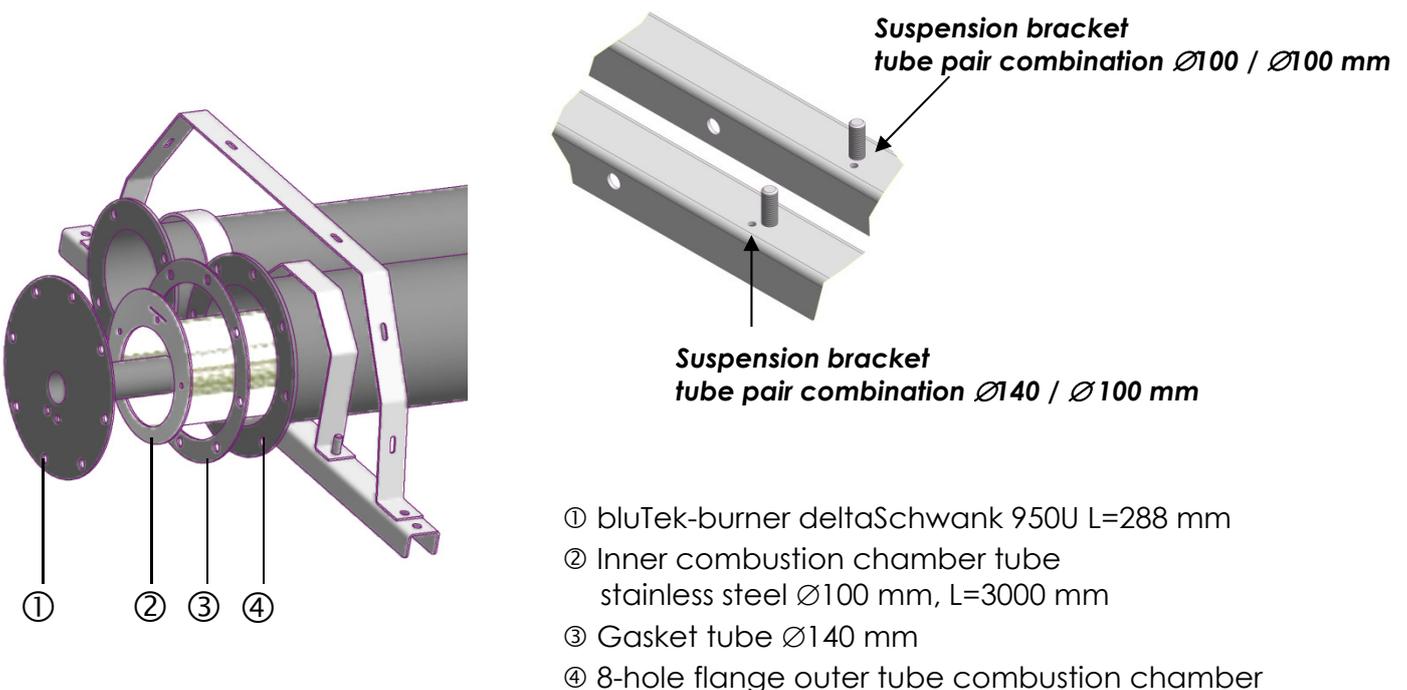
Mounting interface combustion chamber deltaSchwank 950U
